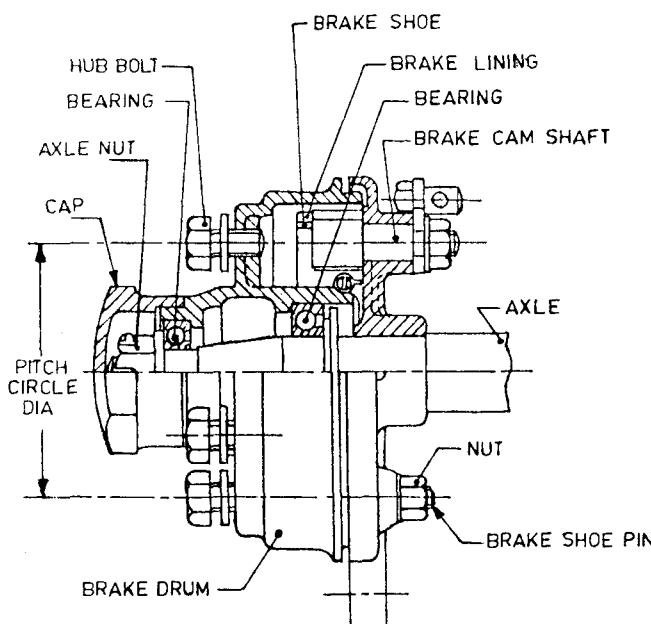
NOMENCLATURE OF AXLE ASSEMBLY
